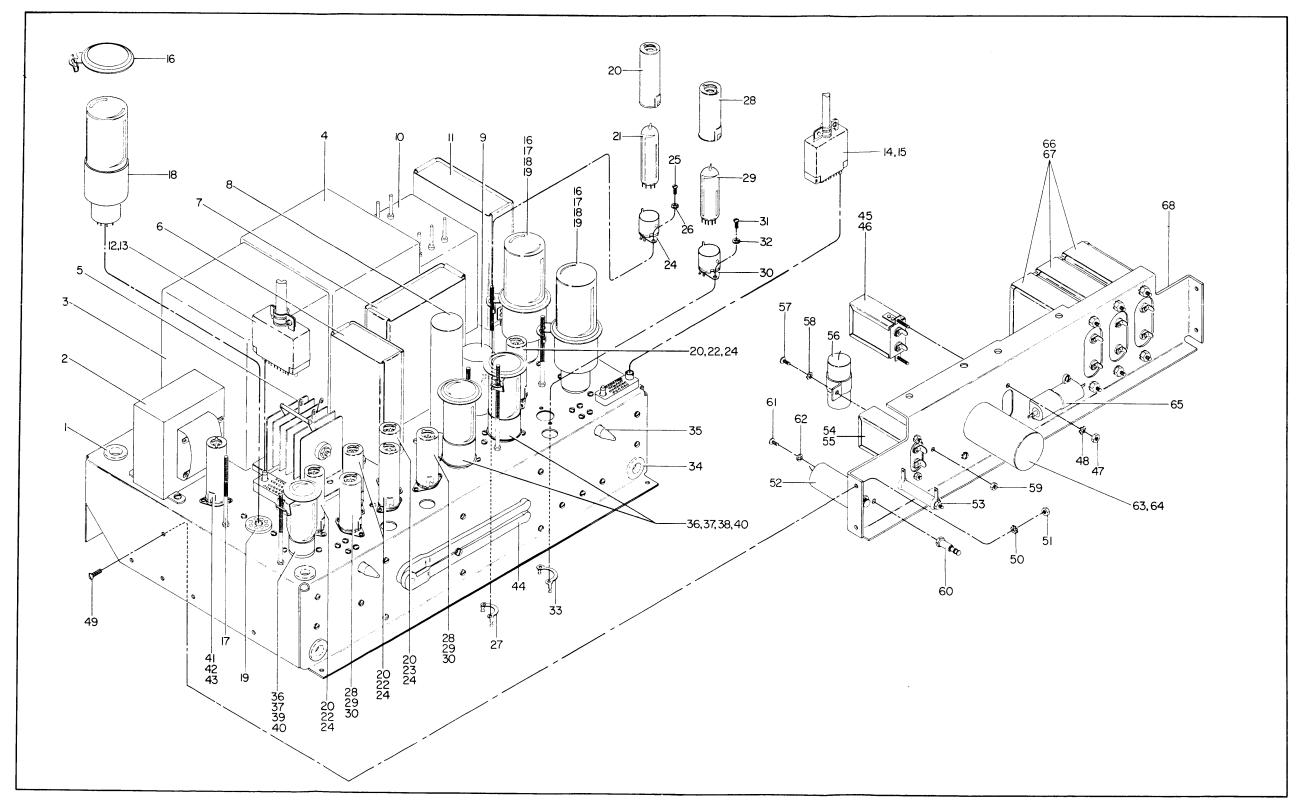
Power Supply Chassis Assembly, Top Exploded View (Sheet 1 of 2 Sheets), Index Nos. 1 through 68
